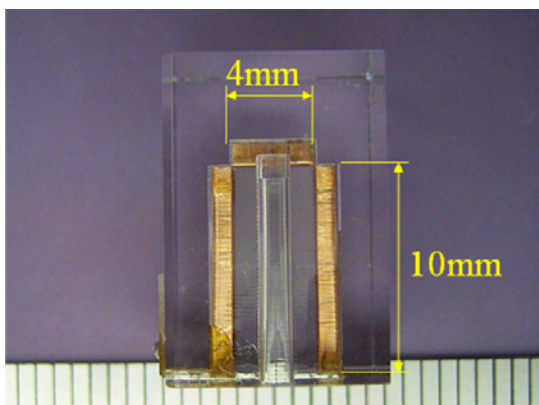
Assembly Rogowski-chaddock coil.
